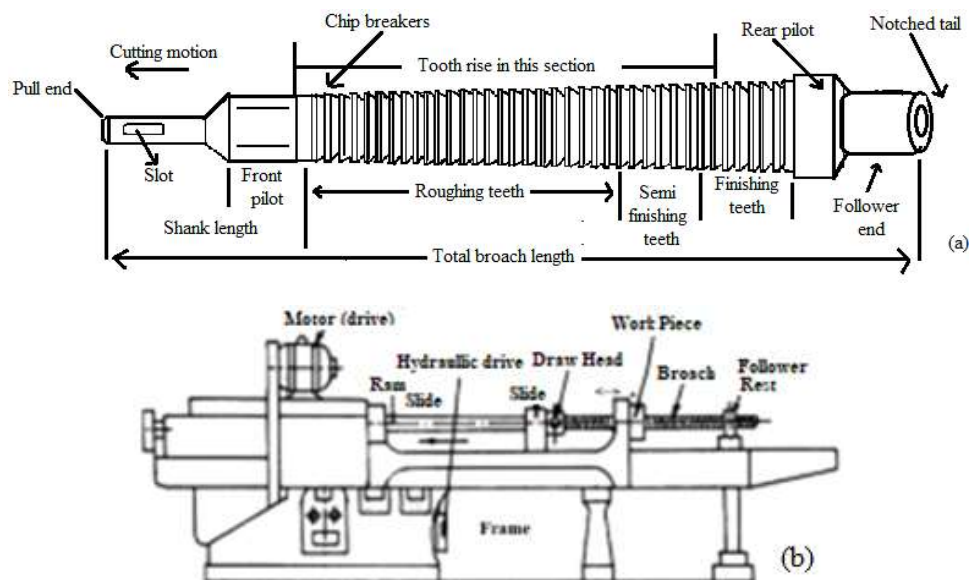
(a) A broaching tool (b) A broaching Machine with a broaching tool [6]
